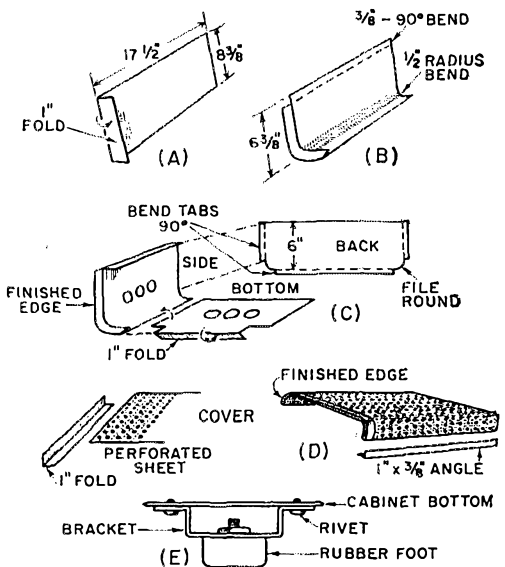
Bending details. A—Forming front edge of side piece. B—Rounding bottom of side piece. C—Joining of side, back and bottom pieces. D—Forming front edge for perforated cover from angle stock, and bending side ends of cover. E—Bracket for rubber-foot mounting.
